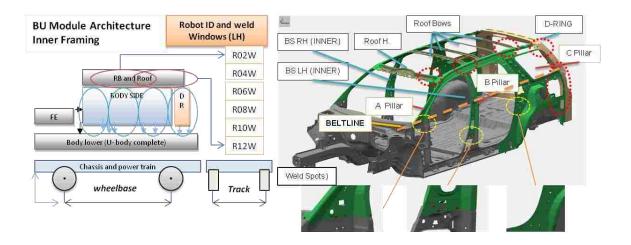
Inner framing modules interface and robots welding zones
